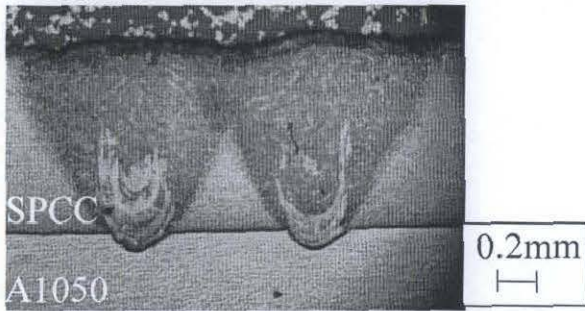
Macrostructures of the welds of SPCC/A1050.
